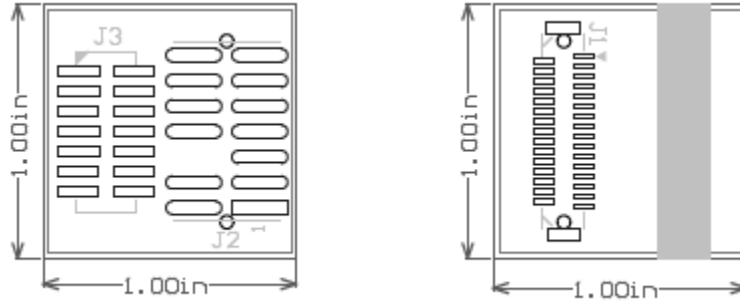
L138/1808/1810/6748 Debug Adapter Mechanical Outline
